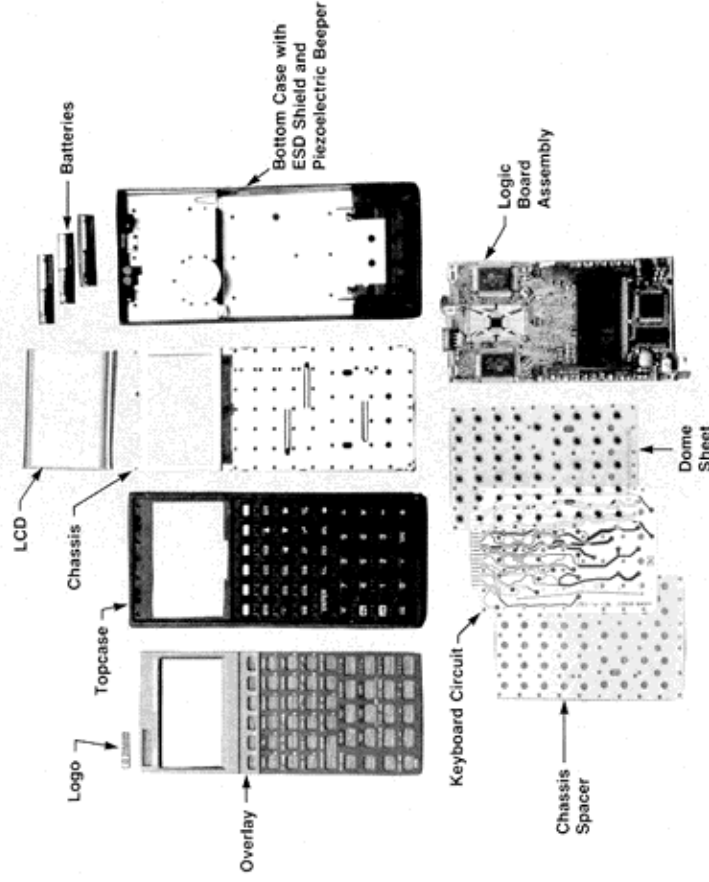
The three HP 48SX subassemblies are the topcase, the printed circuit assembly, and the bottom case. They are built from 24 mechanical parts and various ICs, discrete components, and surface mount devices.
